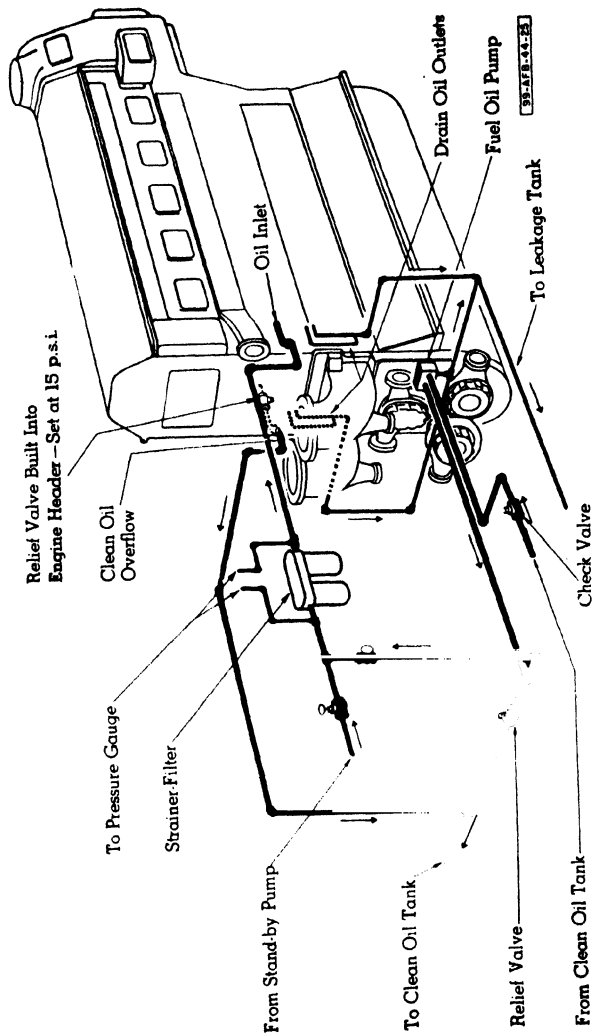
Fuel oil piping—Fairbanks Morse opposed-piston engine. The fuel system consists of the supply and injection systems. The supply system includes the clean oil service tank, stand-by pump, built-in supply pump on the engine, strainer-filter, gauges, and the necessary piping and fittings. The fuel supply pump is driven by gears from the lower crankshaft. The supply pump draws fuel from the clean oil service tank and delivers it through the strainer-filter to the engine inlet. The capacity of this pump is such that more fuel is pumped into the header than is needed by the injection pumps with the result that a pressure of about 15 lb is built up and maintained in the header. A relief valve built into the header regulates the pressure, allowing the excess fuel to return to the tank.
